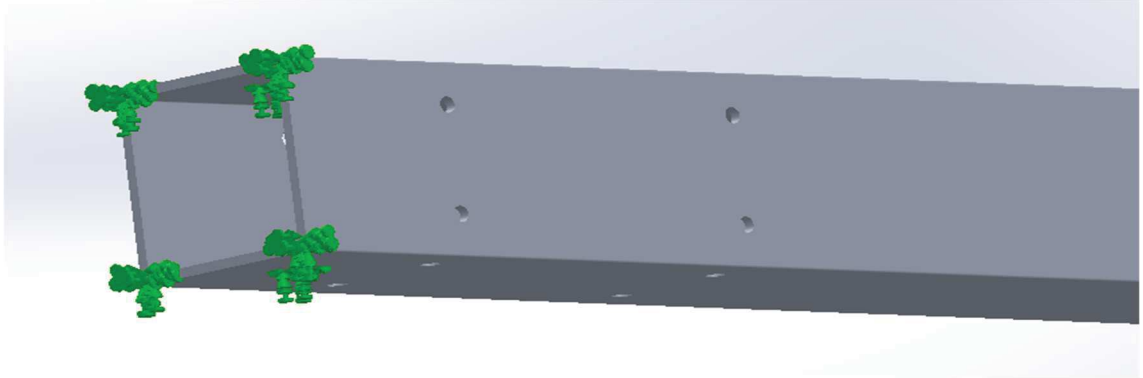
Drilled M5 holes on the boom for the attachment of the pulley
